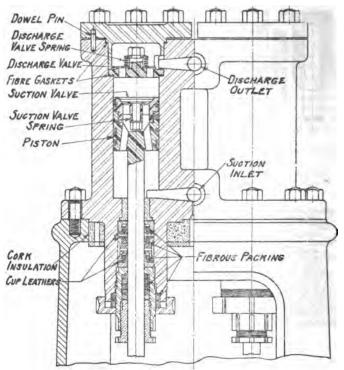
Cylinders of American Carbonic Machinery Co. vertical, single-acting, twincylinder, CO₂ compressor.
